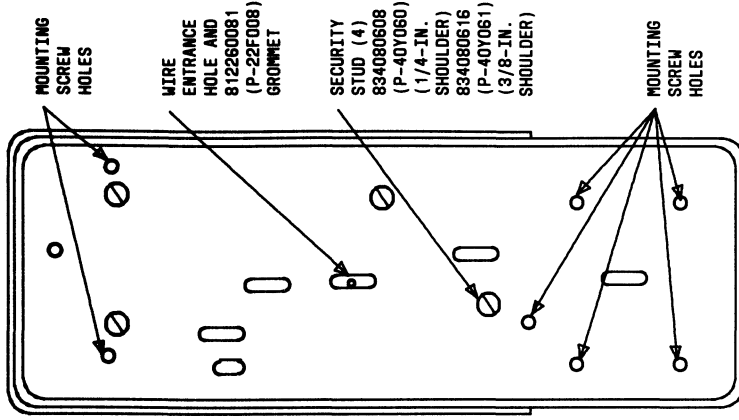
Location of Mounting Screw Holes and Security Studs in 1D-Type Set
